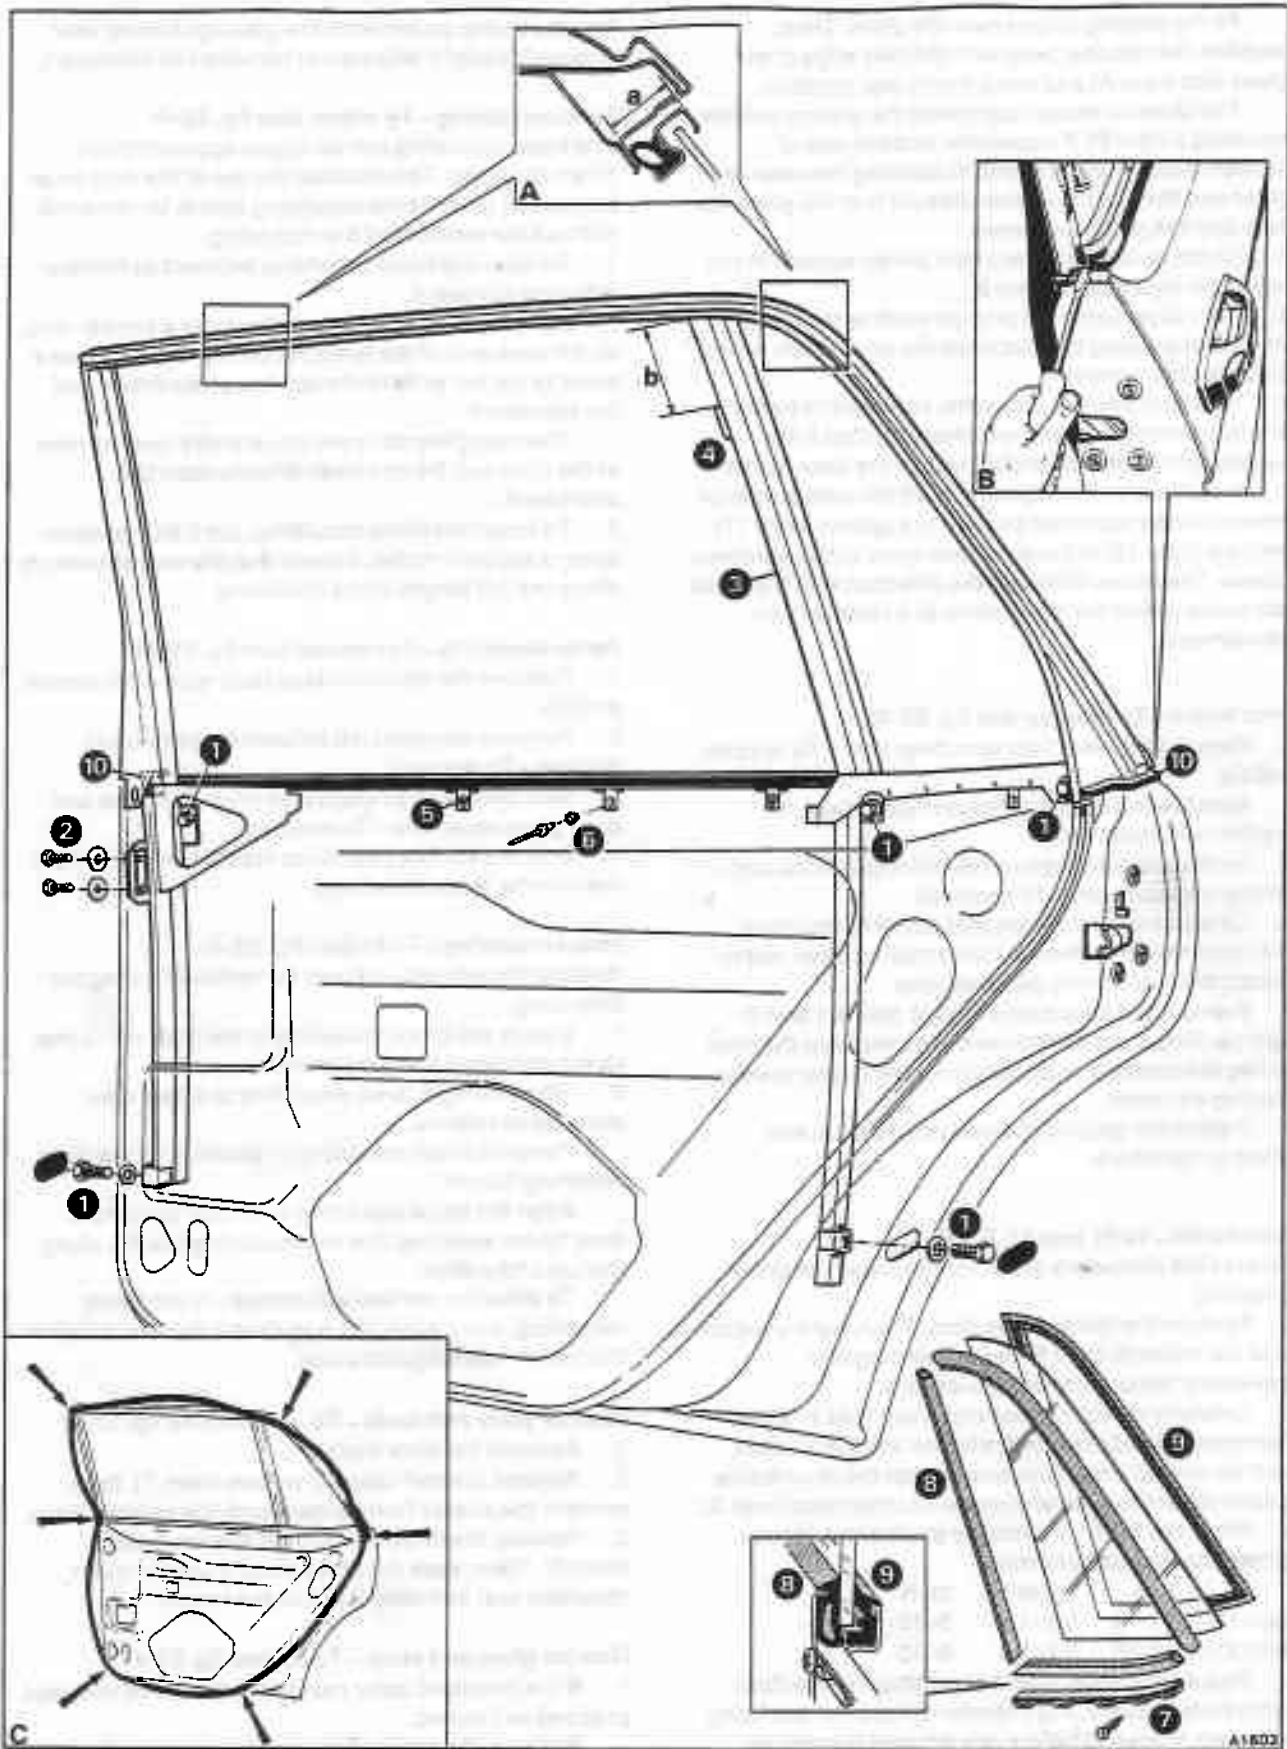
Door frame, door to body seal, quarter glass sealing arrangement, and fittings
